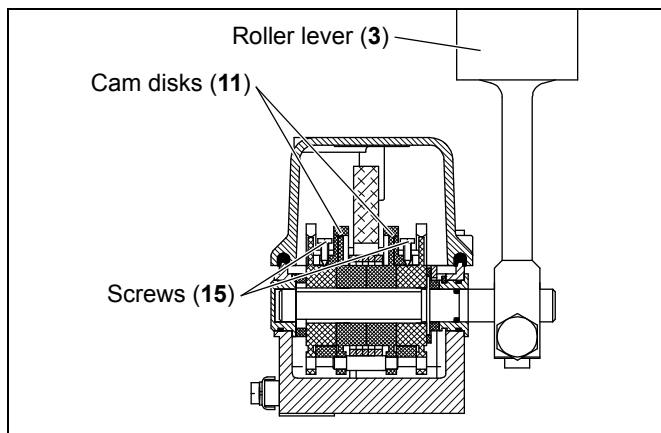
Adjusting the switch points – Loosening screws in the cam disks
